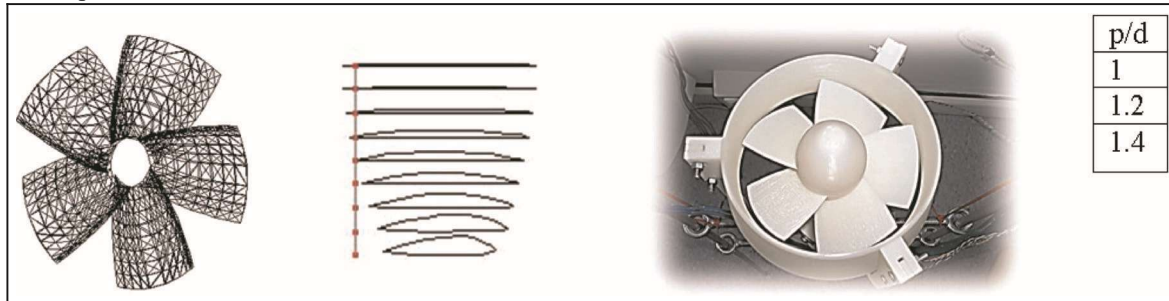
Fast prototyping of propellers from CAD model to ABS prototype.
